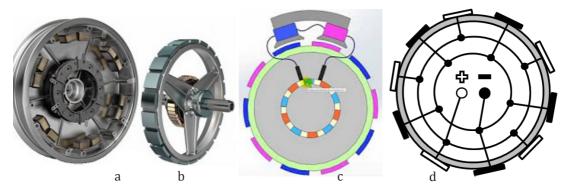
Design of Shkondin's motor-in-wheel: a – rotor; b – stator; c – phasing of the poles; d – connection of stator collector plates.
